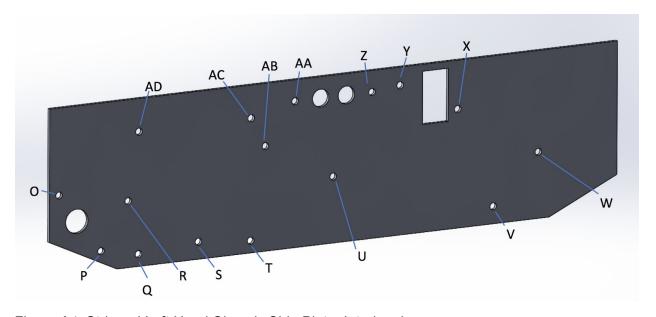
Stripped Left Hand Chassis Side Plate, Interior view
